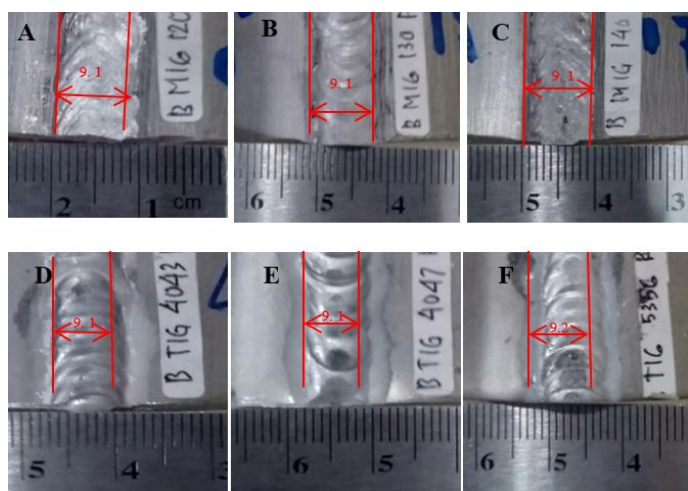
Weld seams of samples joined by GMAW: (a) GMAW-1, (b) GMAW-2, (c) GMAW-3, (d) GTAW ER4043, (e) GTAW ER 4047, (f) GTAW ER5356
